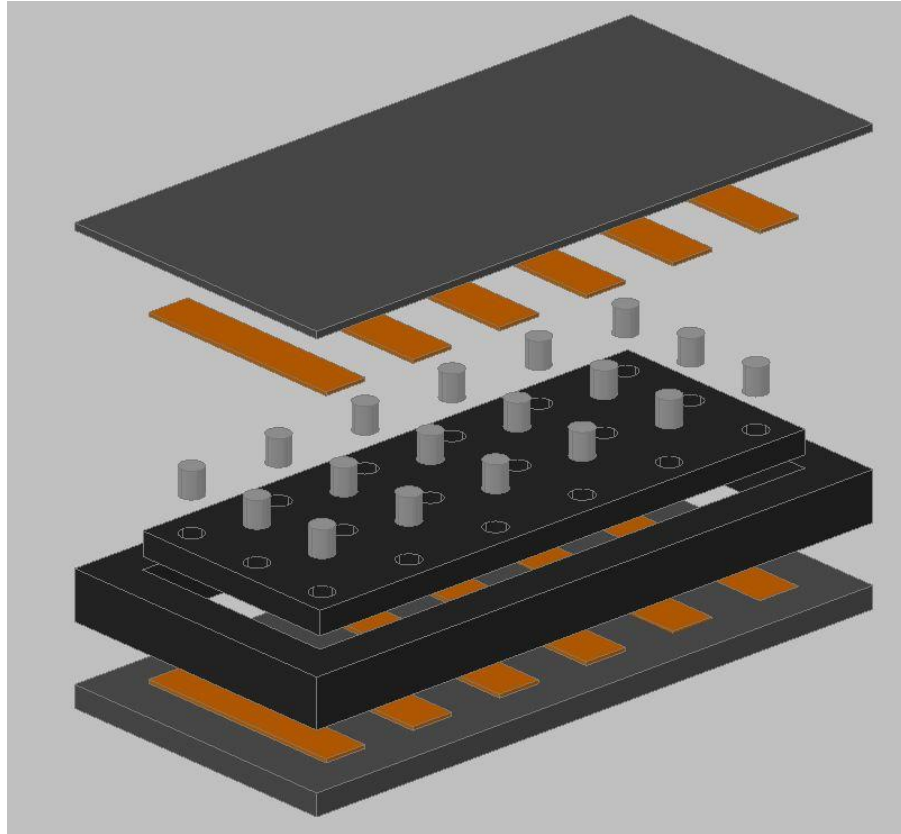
Chart. Three dimensional view of the Assembly Design IX.
